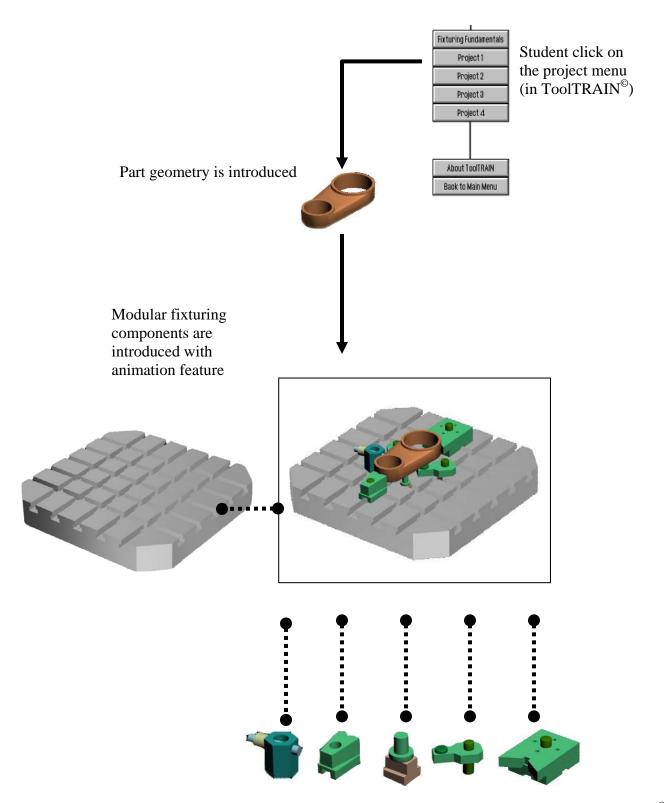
Example of implementation project (modular fixturing configuration) in ToolTRAIN<sup>©</sup> All components were modeled and rendered by the Veekit O'Charoen, original fixture design concept from Halder Norn+Technik, Flexible Fixturing System Inc., East Granby, CT 06026-0787.
